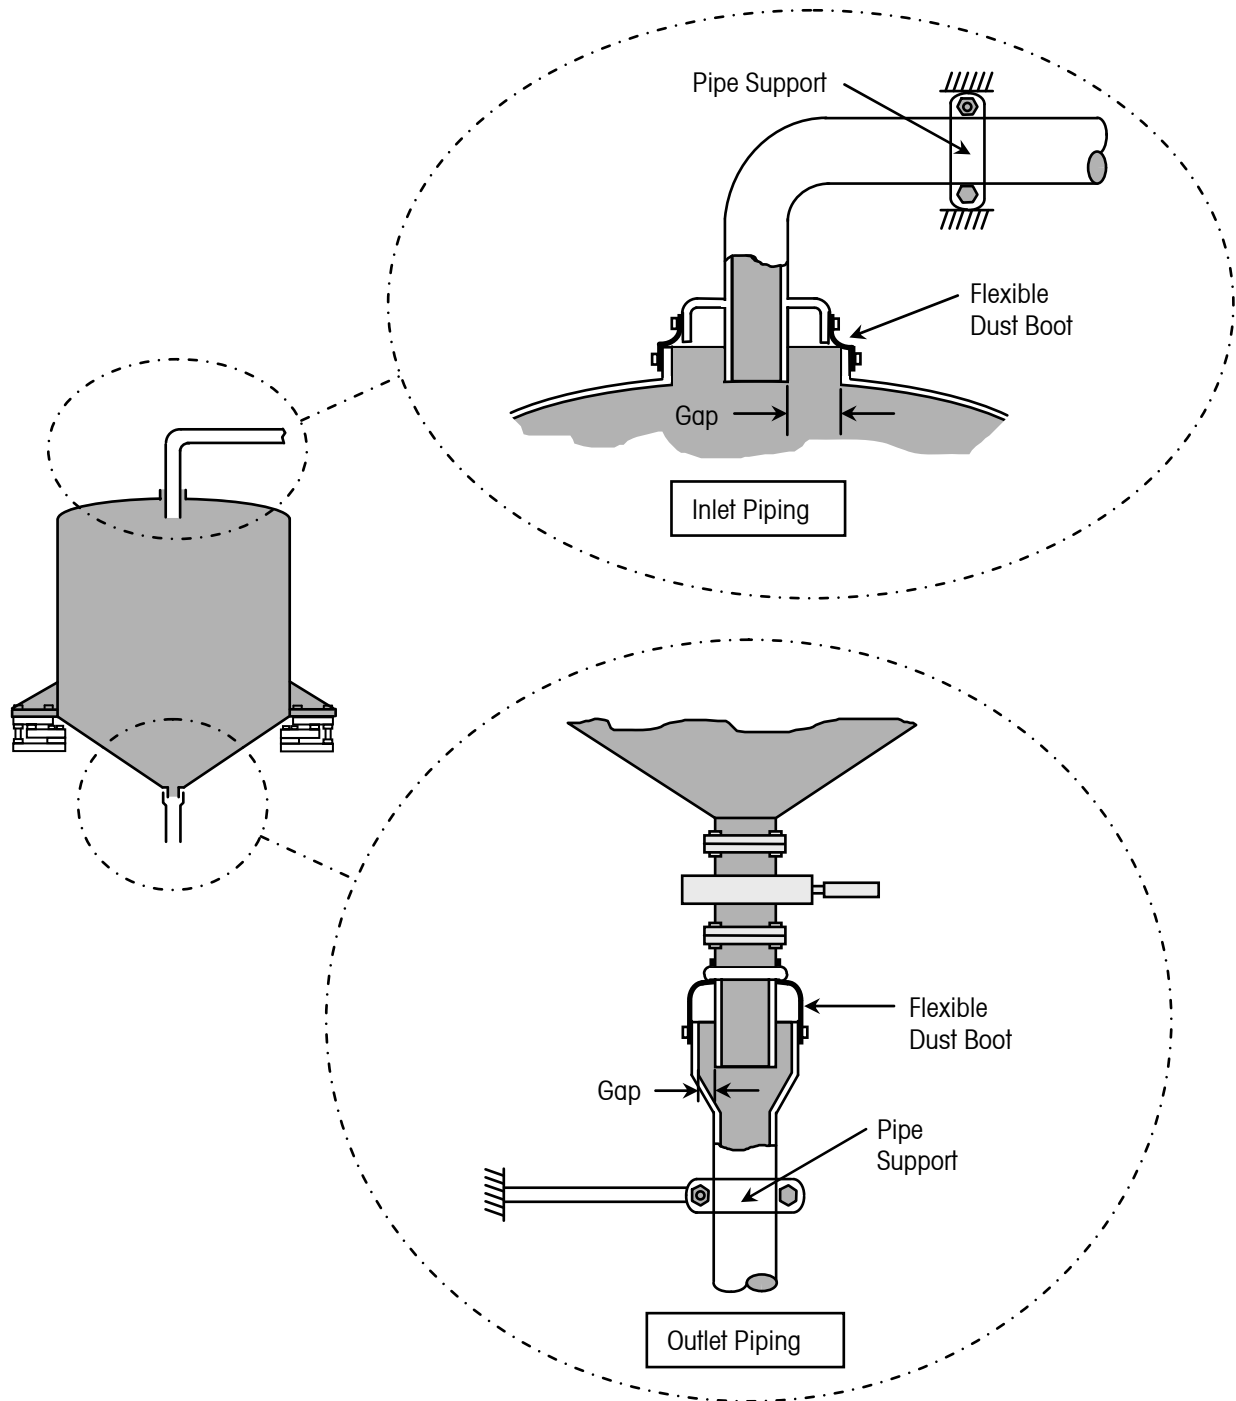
Recommended Flexible Connections Between Tank and Piping
